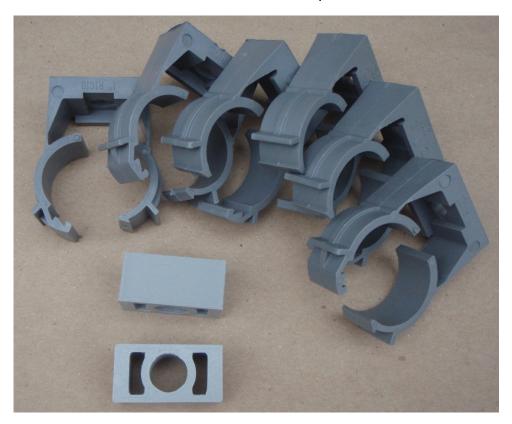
6 Quick Latch pieces & 2 Spacers
